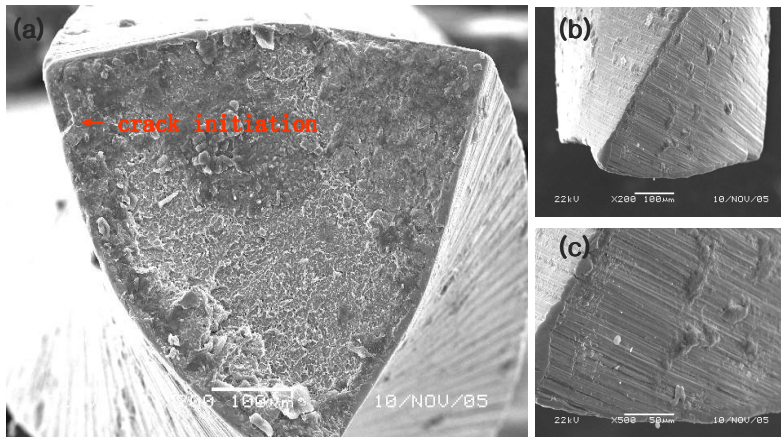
SEM and EDS showing the fractured surface morphology of Ni-Ti file fractured at the middle part after clinical use. (a) fractured surface (b), (c) lateral face(X 200, X 500)
